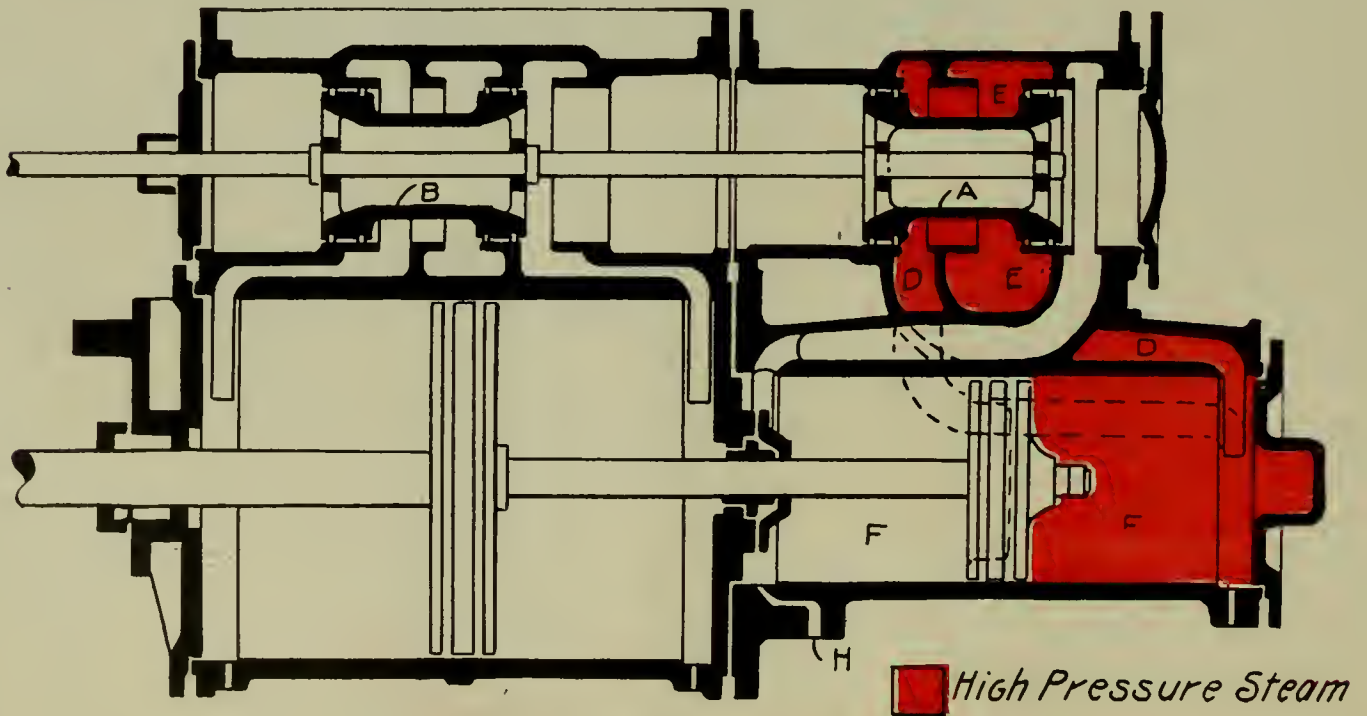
TESTING HIGH PRESSURE CYLINDER PACKING.
